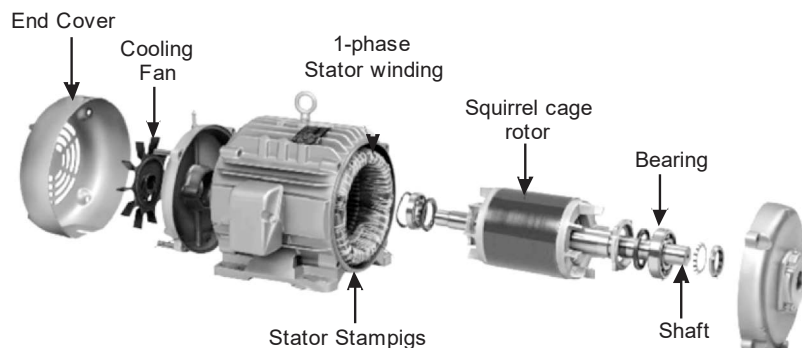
(a): Disassembled Parts of a 1-phase Induction Motor
